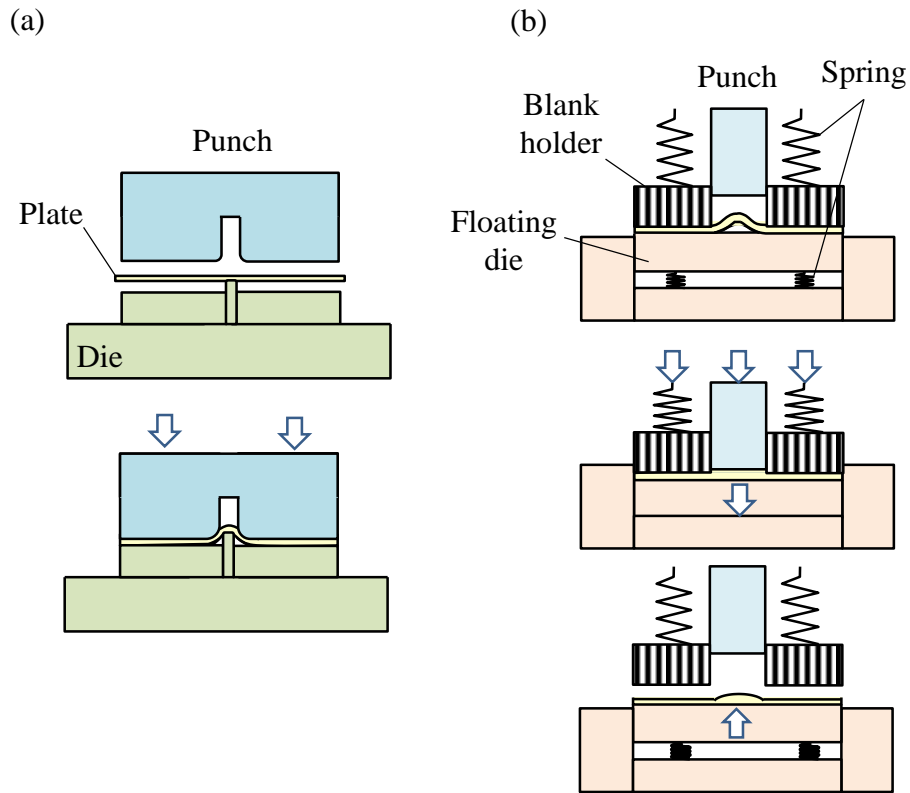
Experimental setup for plate having local thickening by (a) beading and (b) compression.
